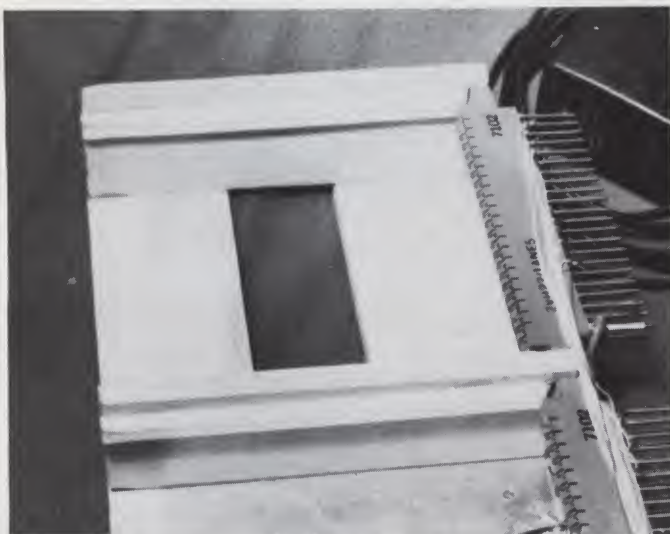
View of chassis construction. End piece is notched for connector lug, and holes are drilled to accommodate press-in lugs of the card guide.
